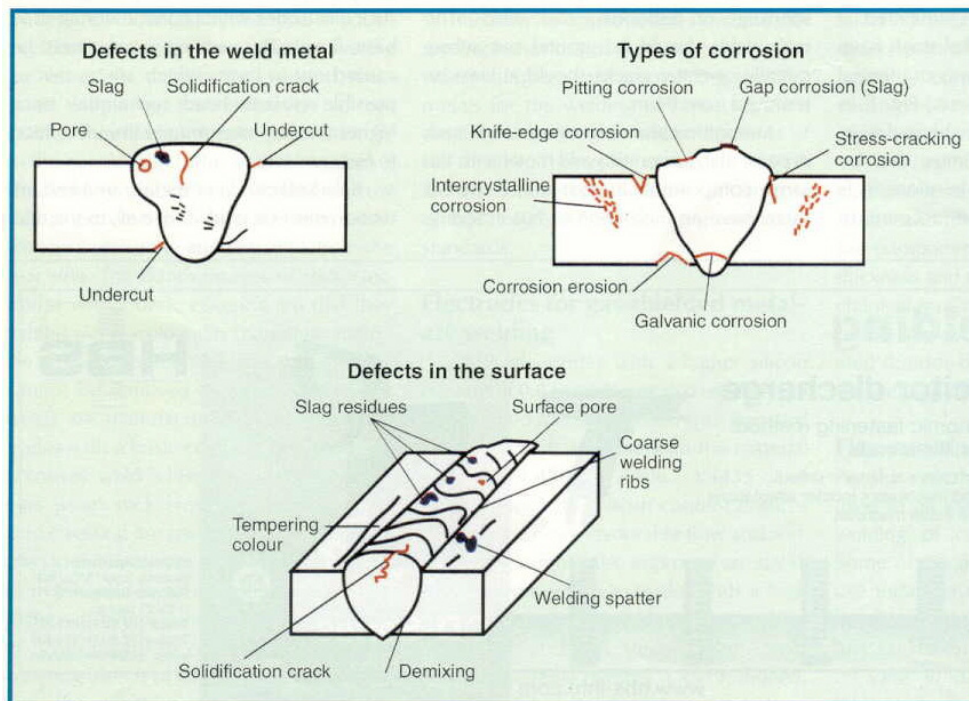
welding defects and corrosion phenomena resulting from these defects [28].
